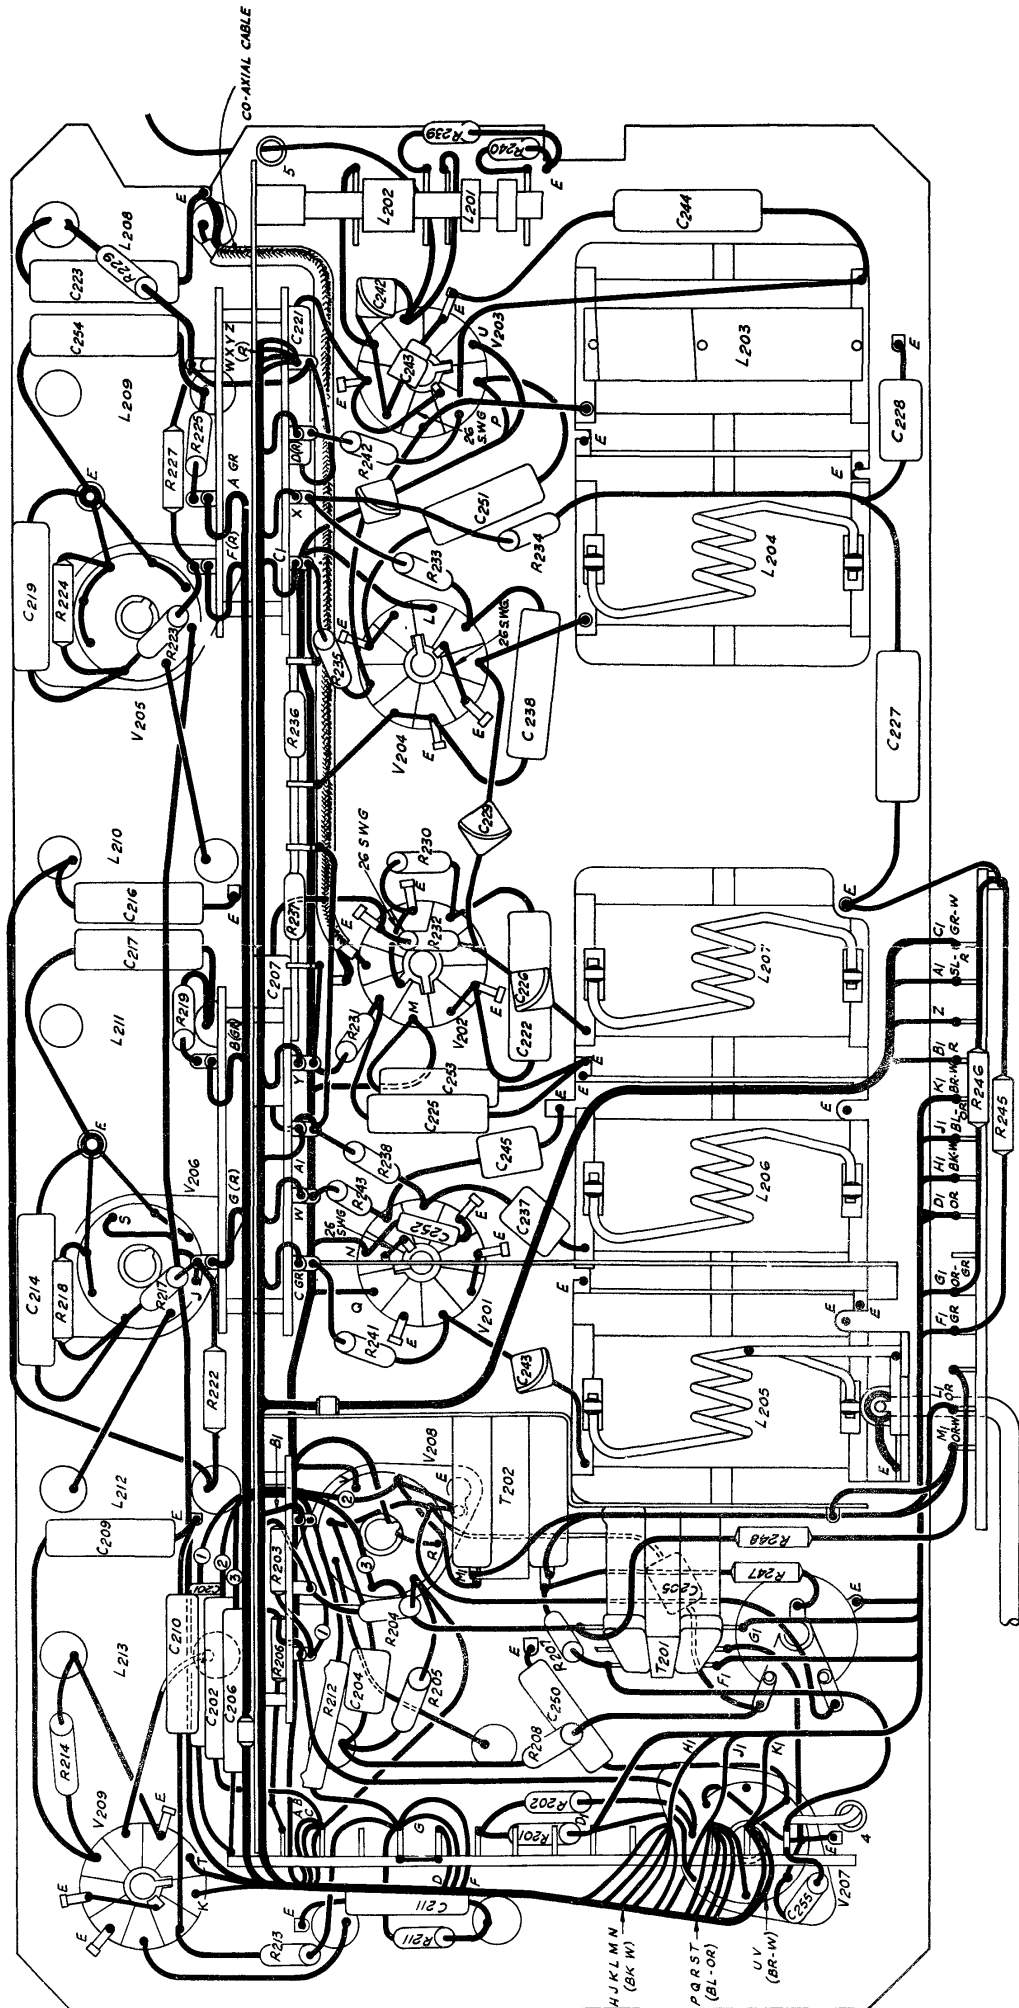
RECEIVER LAYOUT, UNDERSIDE VIEW
